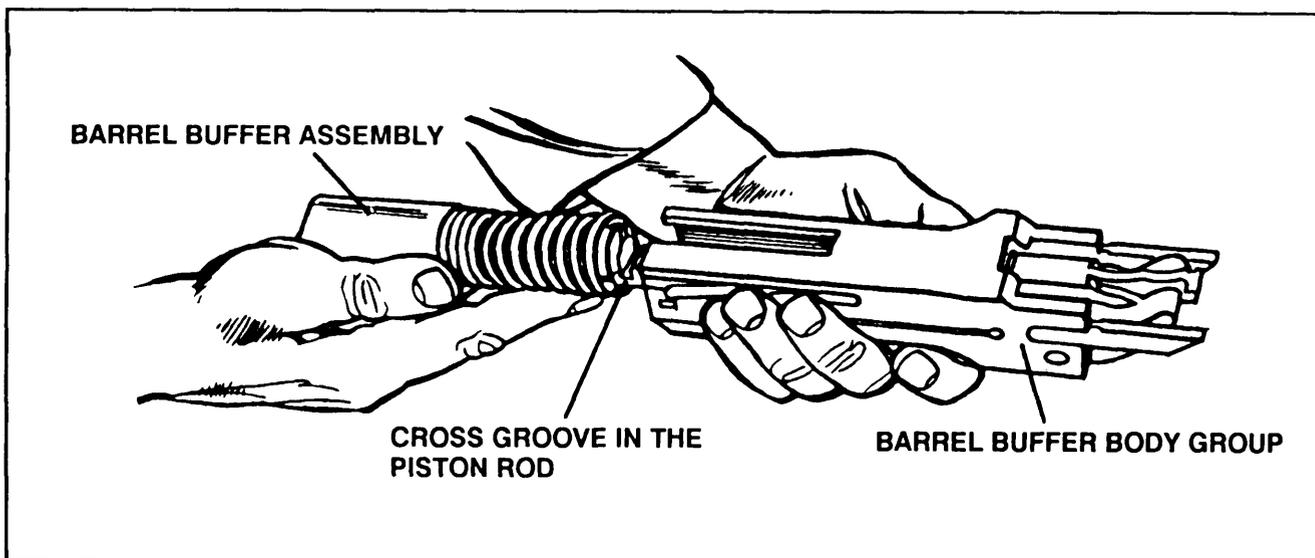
Separating the barrel buffer assembly from the barrel buffer body group.
